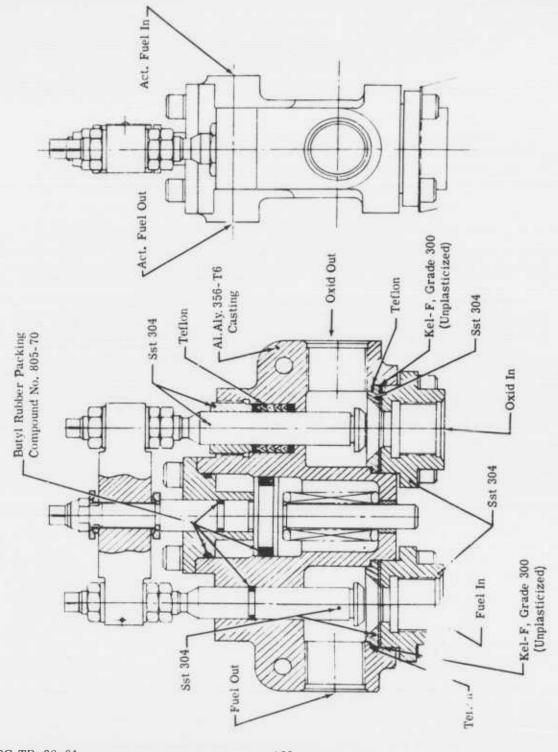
Cross Section - Valve Assembly Bypass Turbine 62-472-213
